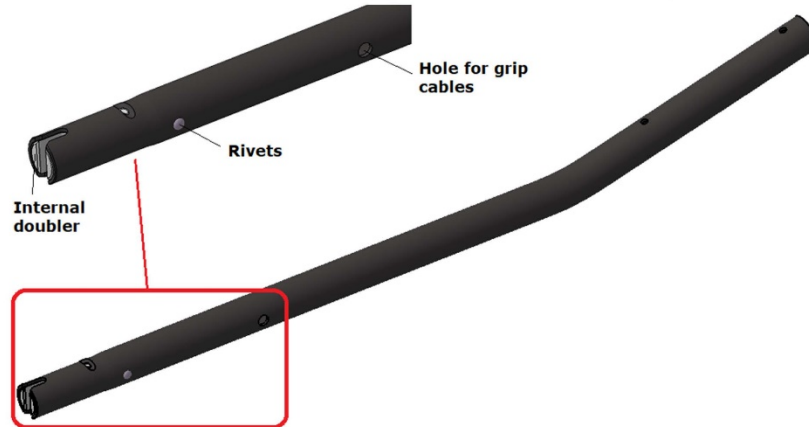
Pilot Collective Stick Tube Assembly P/N M207-20M301-043
